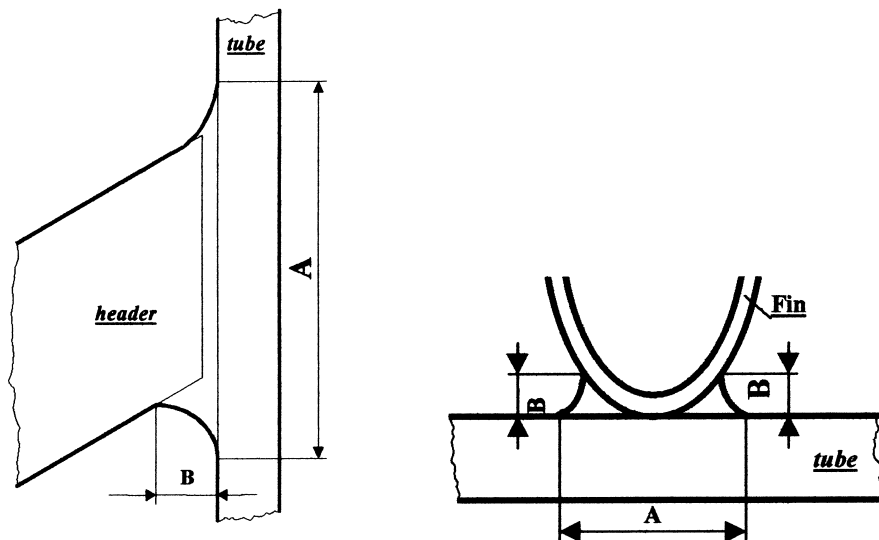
Fillet length and fillet height for joints tube/header and tube/fin
